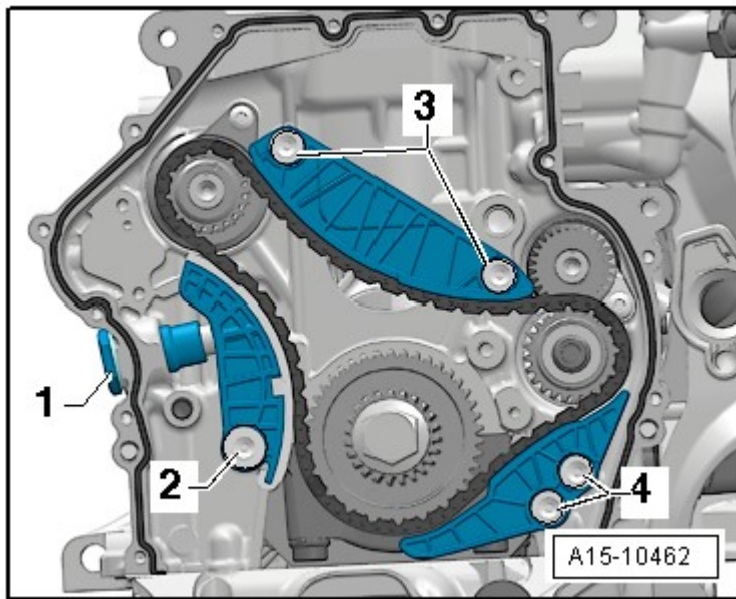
Identifying Balance Shaft Timing Chain, Tensioning Rail And Guide Rails
